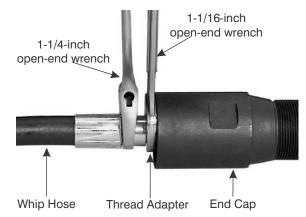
Loosen Hex Fitting and Remove Whip Hose
